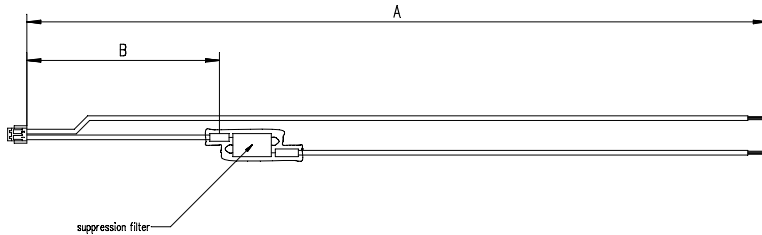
Power Supply Cable with Filtercoil ETV2
